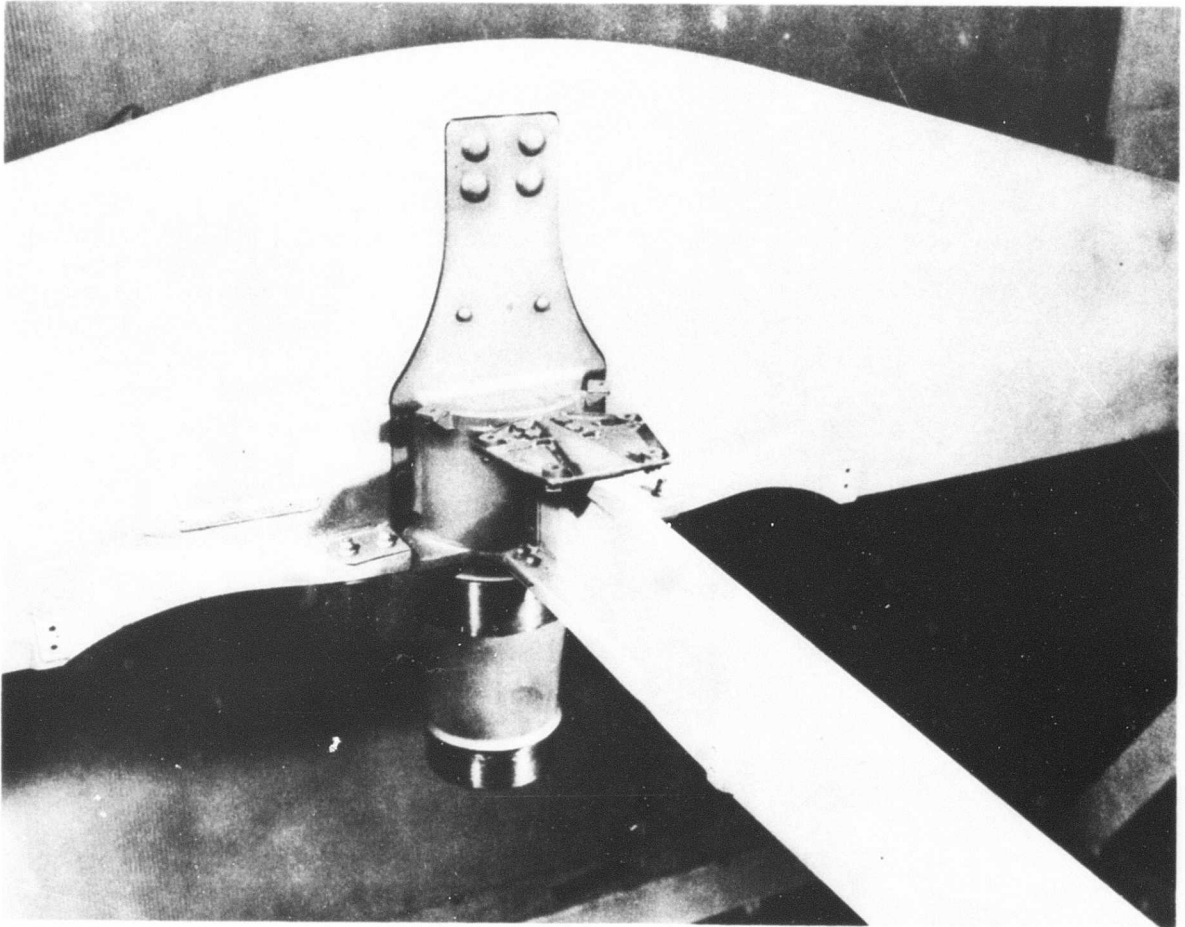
LF-2 Front Frame View Showing the Attachment of the 12 to 6 O'clock and 9 O'clock Cast A356 Aluminum Struts to the Cast 17-4 PH Hub. Also Shown is the Attachment of the 9 O'clock Dome Mounting Bracket to the 9 O'clock Strut and Hub.
